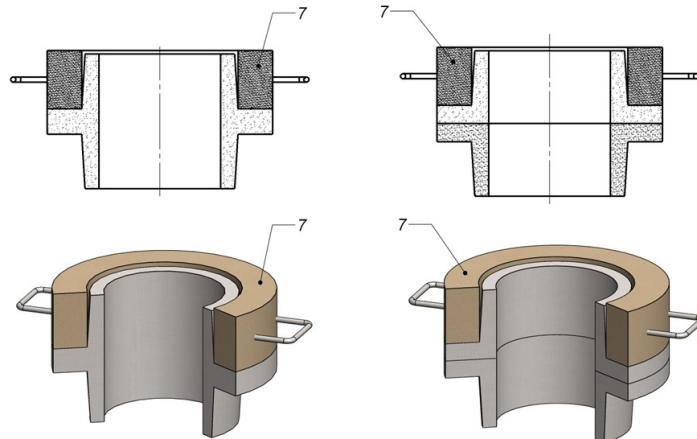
Example of the weighting device installation method for a solid and assembled thermal insulation insert for a circular cross-section mold.
